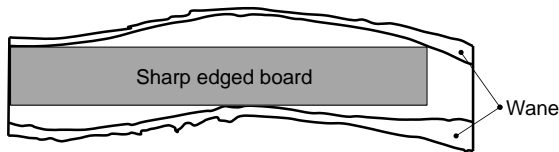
Flat view of a sawn board showing the principle for the edging procedure. The rectangle in the middle represents the maximum dimensions of a sharp edged board that can be achieved from a cant or an un-edged board
